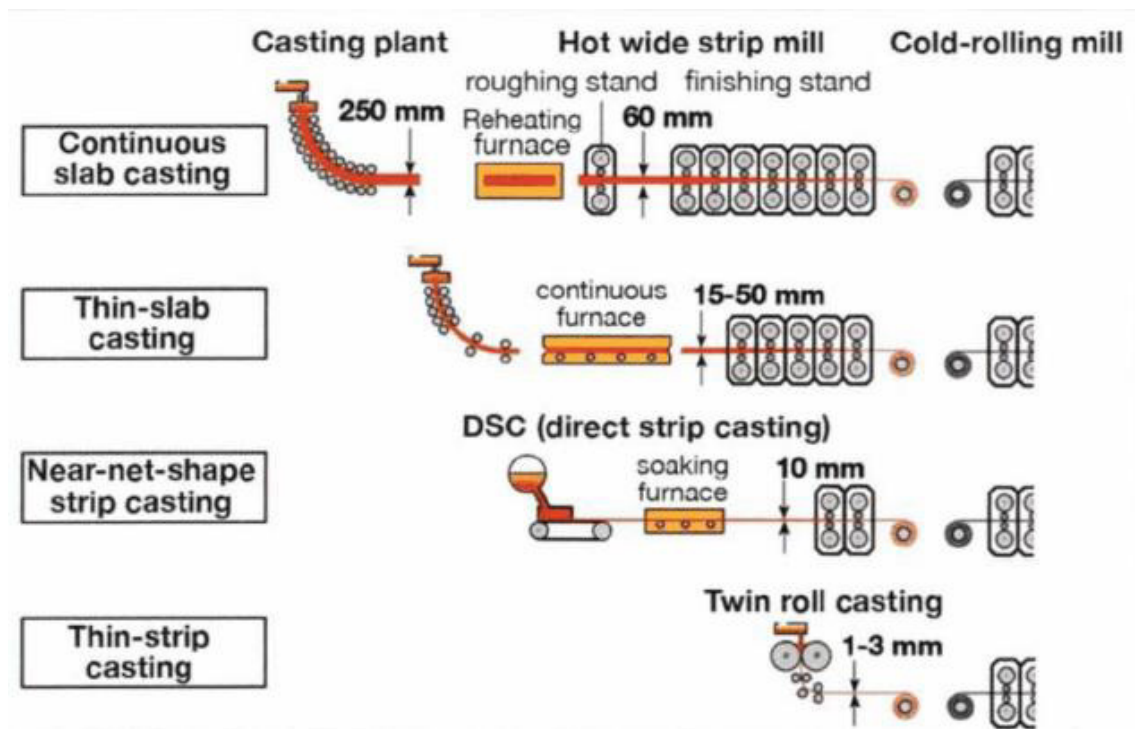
Hot-rolled strip production layout depending on casting technology. [11]
